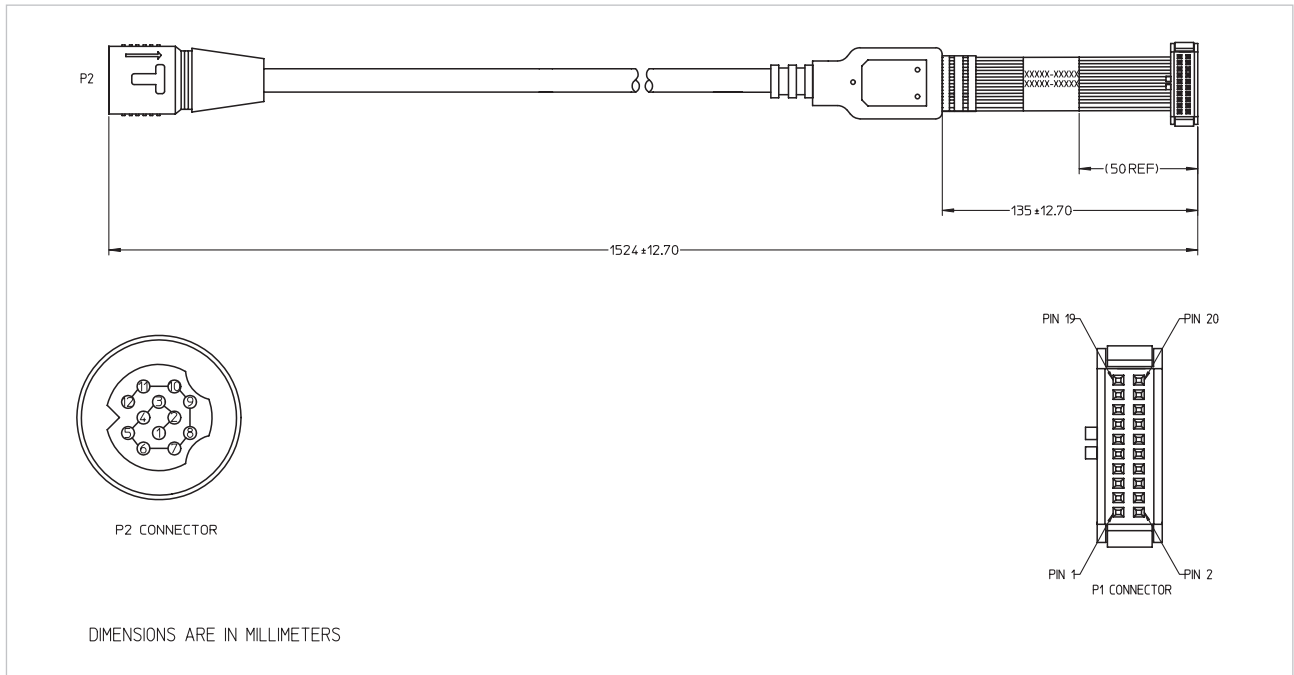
Option 003 - 20 pin to 12 Pin Viking interface cable assembly
